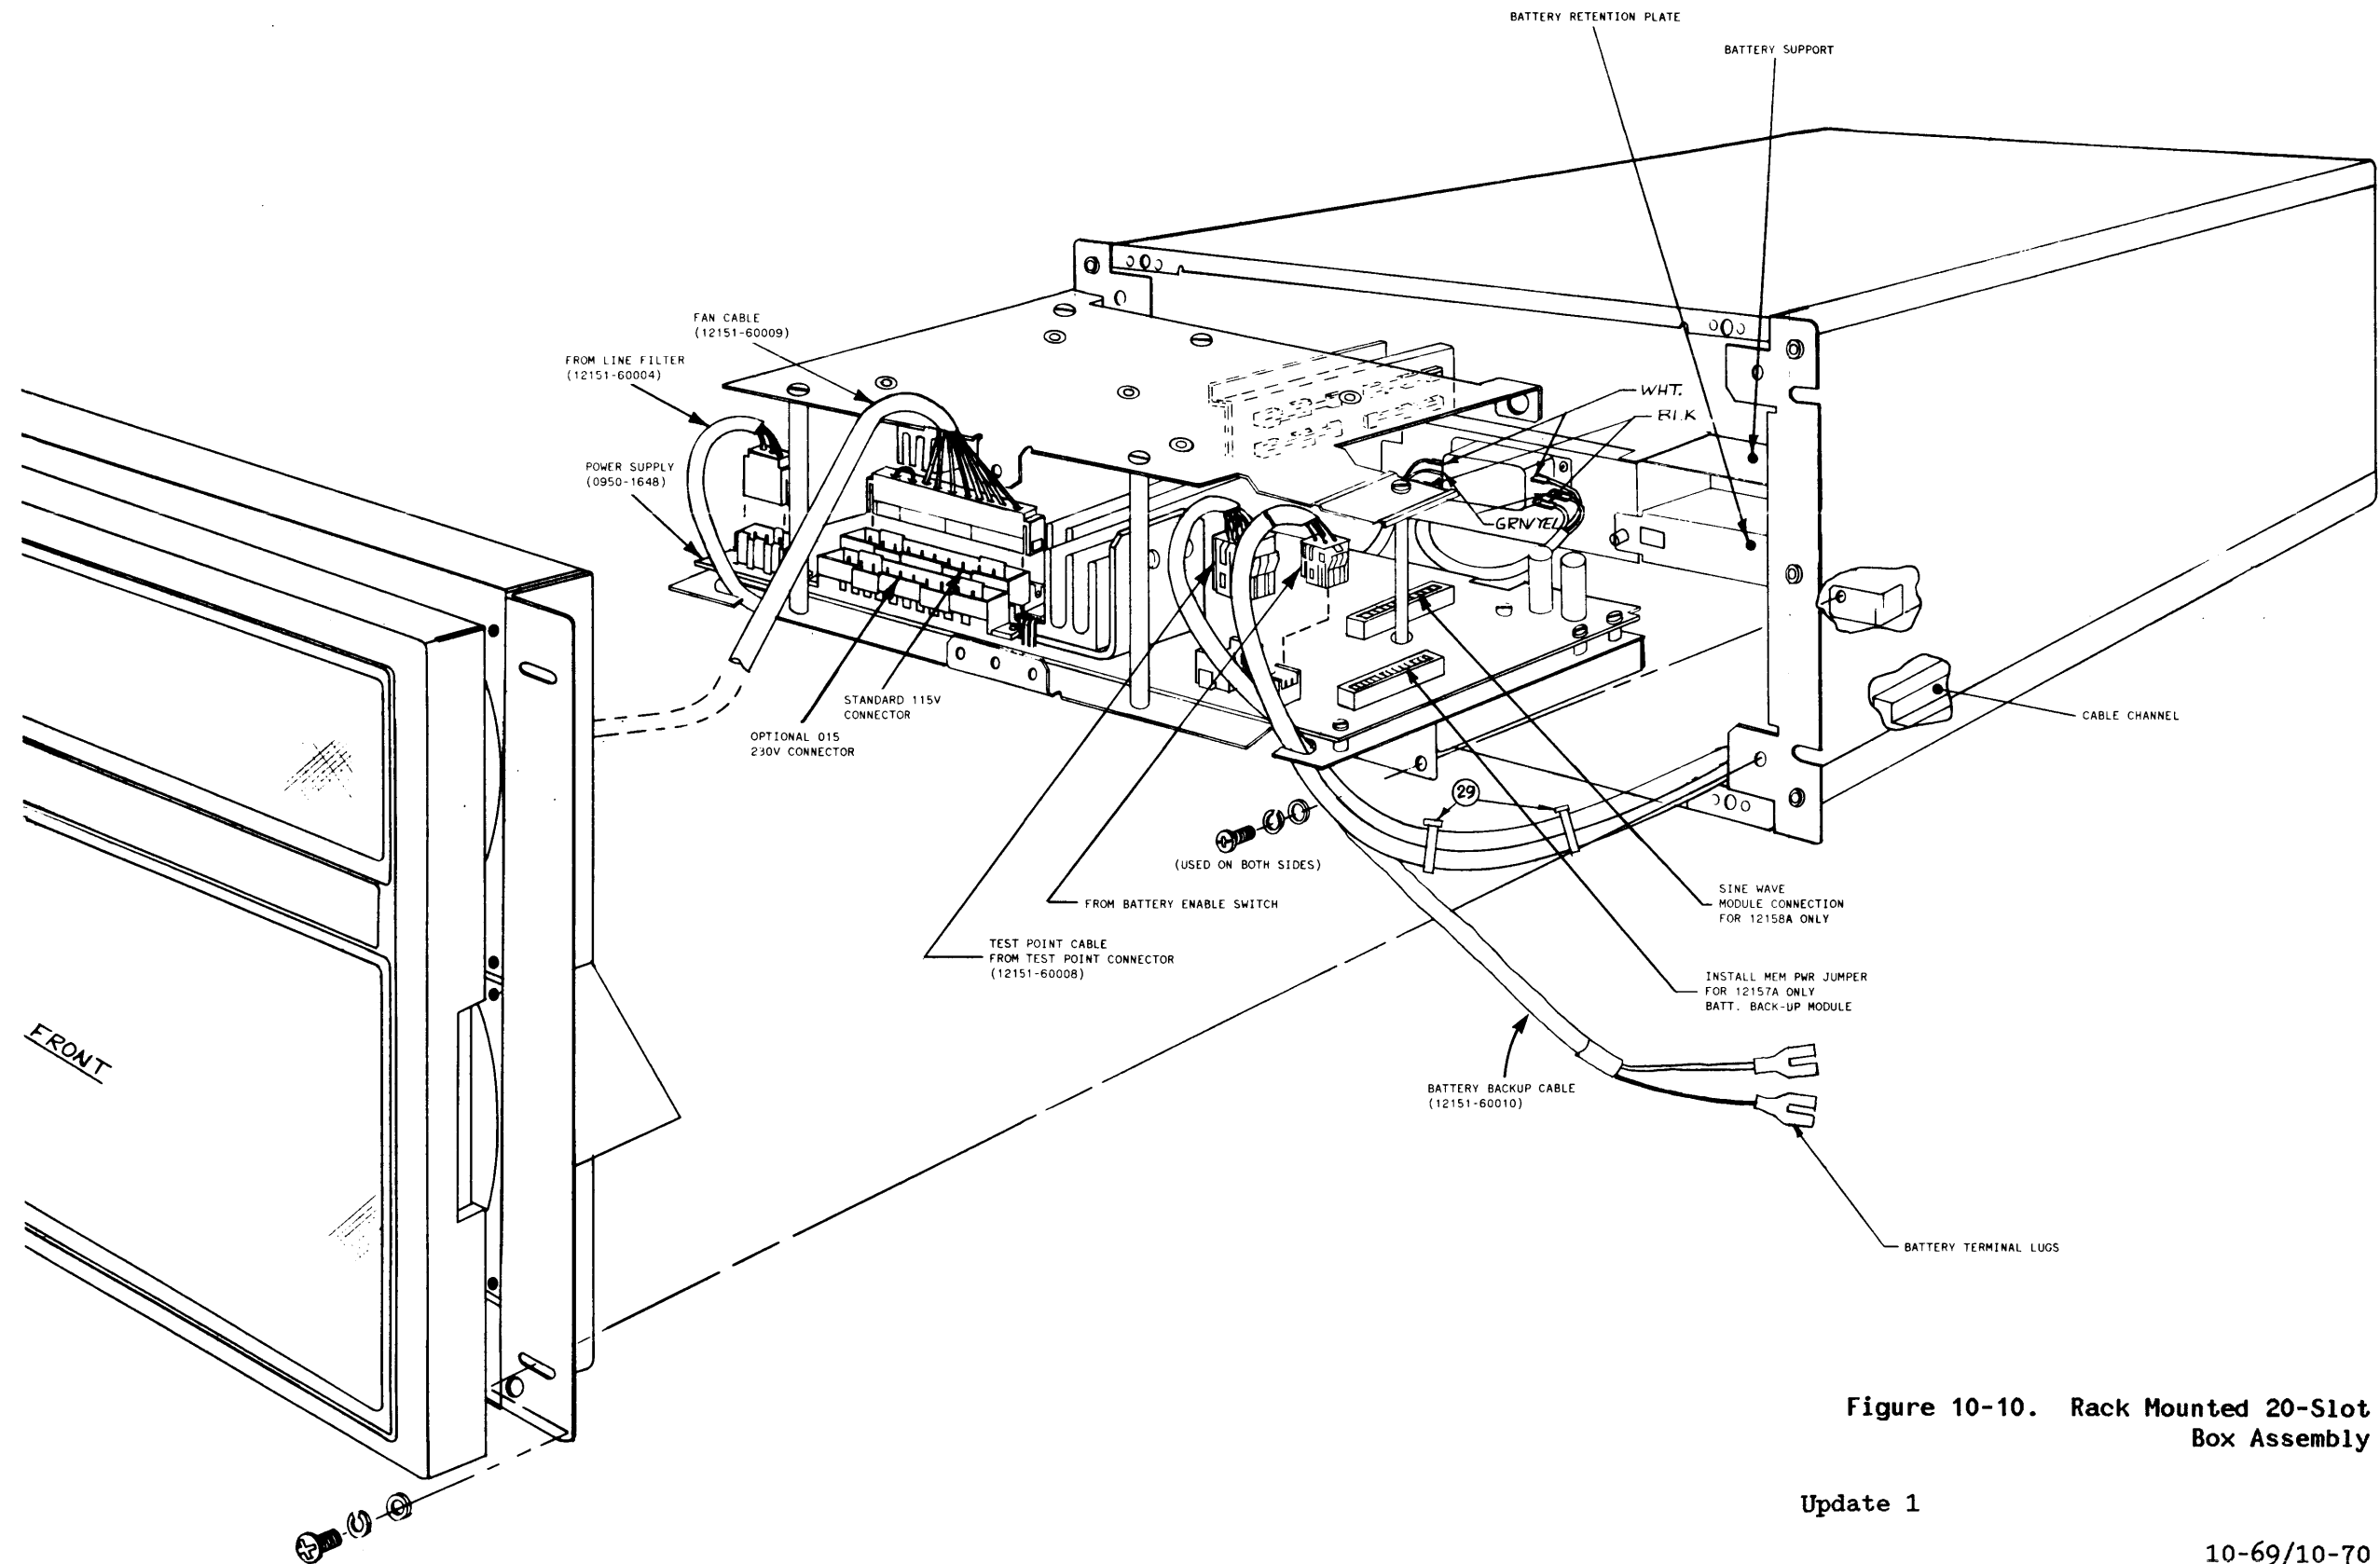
Rack Mounted 20-Slot Box Assembly
